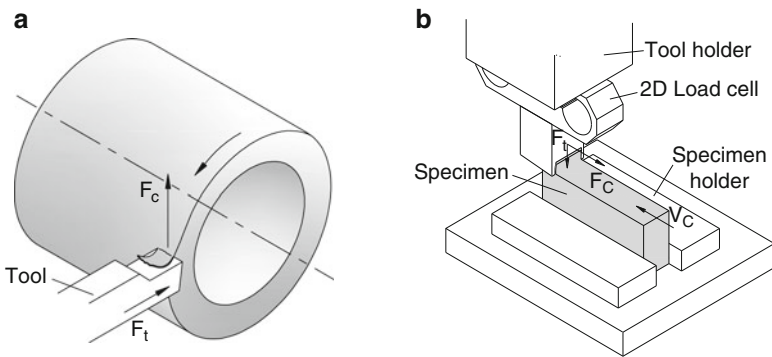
Commonly utilized apparatuses for the orthogonal cutting test: (a) Turning a tube with large diameter; (b) Machining a parallelepiped specimen
